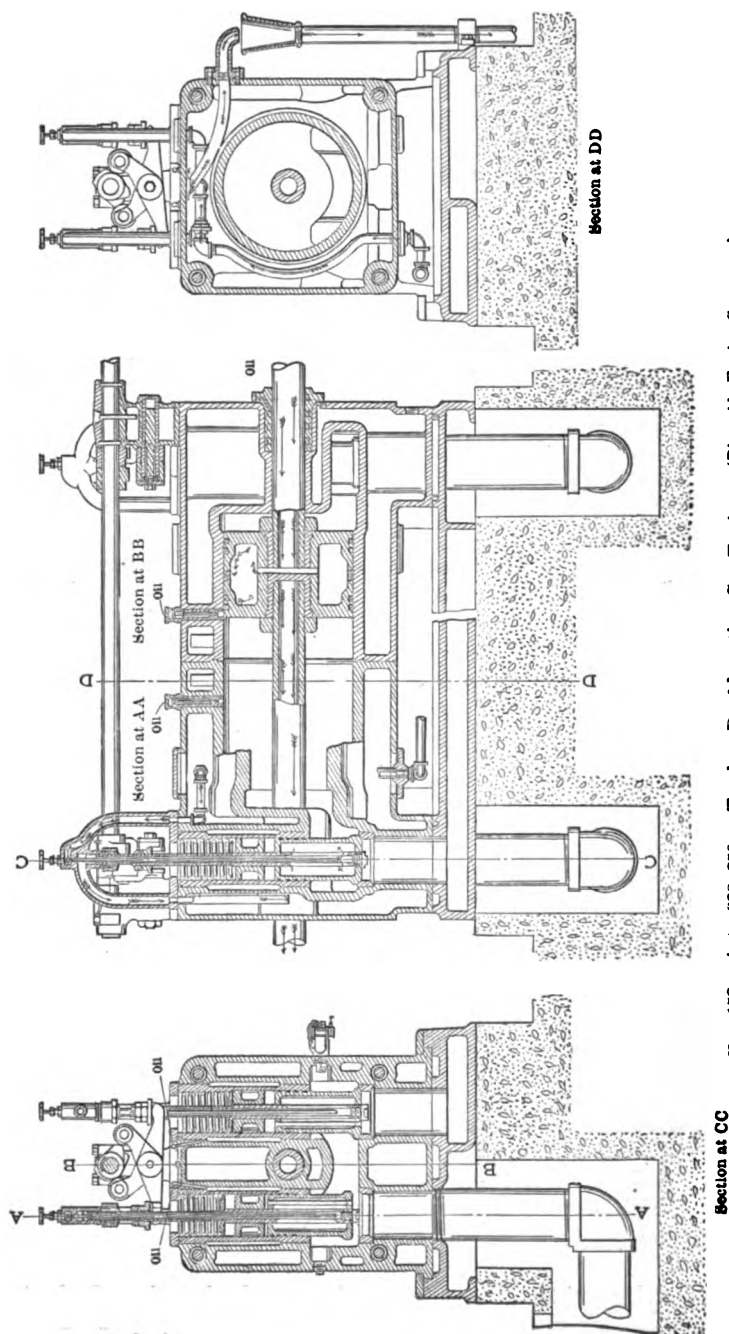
Arts. 338, 350. — Tandem Double-acting Gas Engine. (Riverside Engine Company.)
